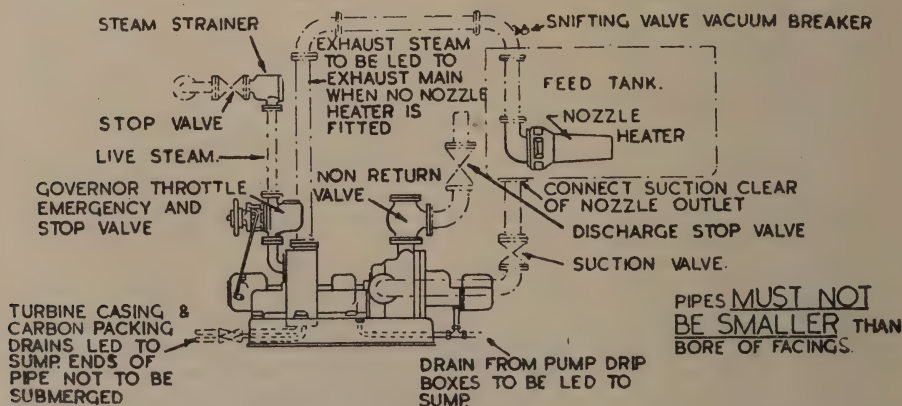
Typical arrangement of turbine-driven feed pump exhausting to nozzle heater in feed tank.
